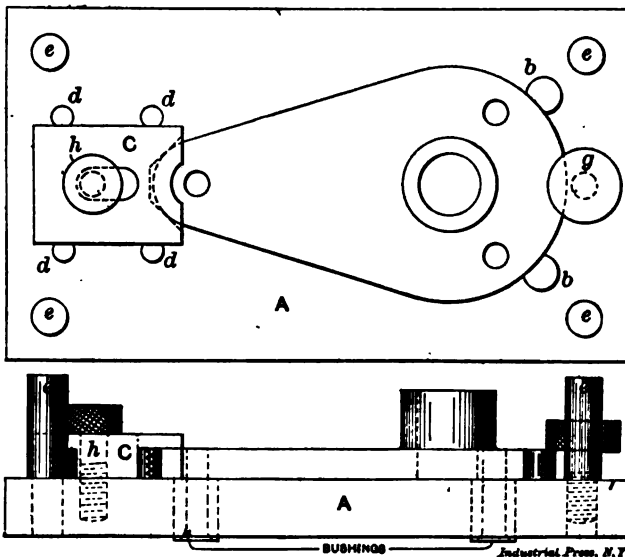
Jig for Drilling Piece Shown in Fig. 48, with Work in Position.
